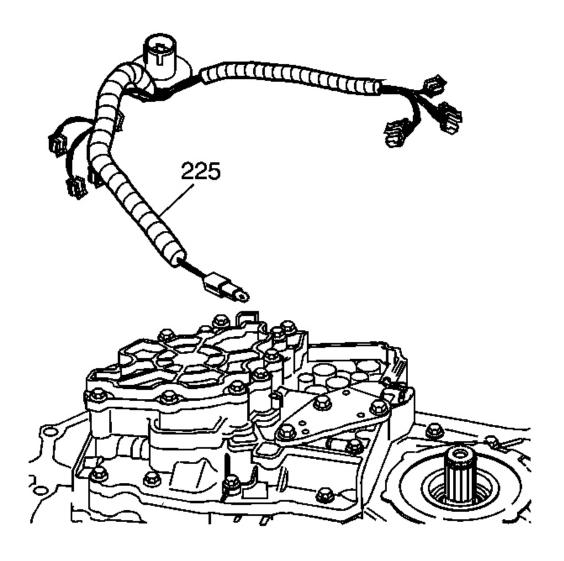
Identifying Wiring Harness Assembly Courtesy of GENERAL MOTORS CORP.
